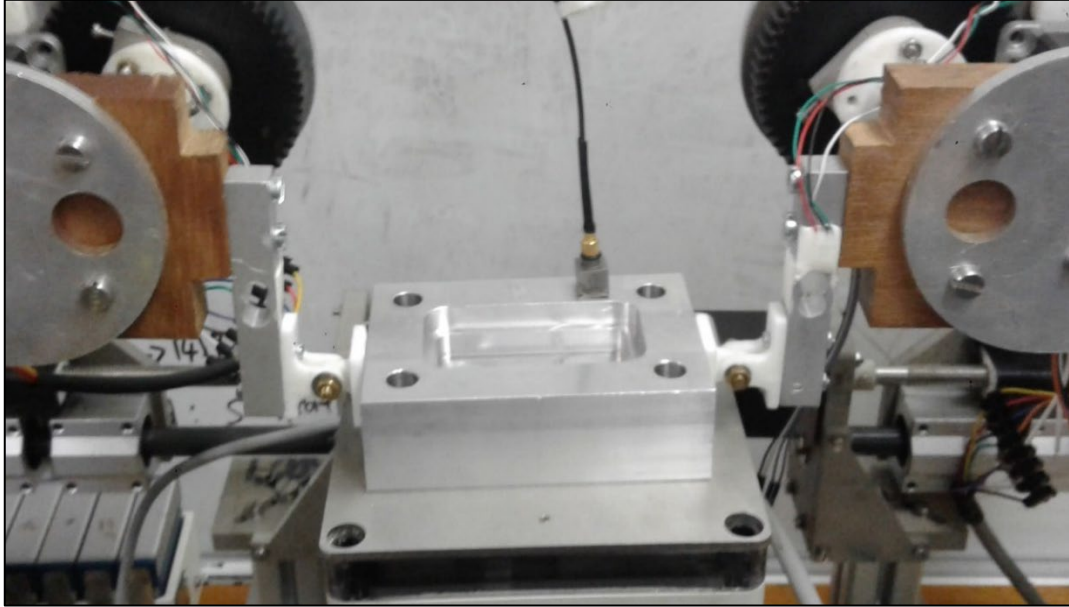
Part 1 fixtured on the fixture bed with accelerometer attached
